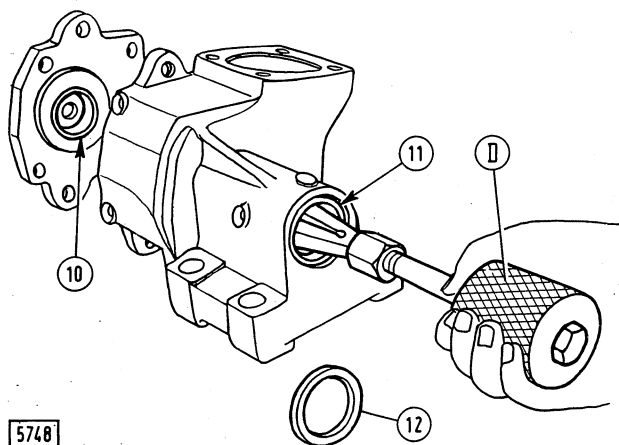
Removing the cup of the lower tapered roller bearing (7) with the universal puller A 537105
